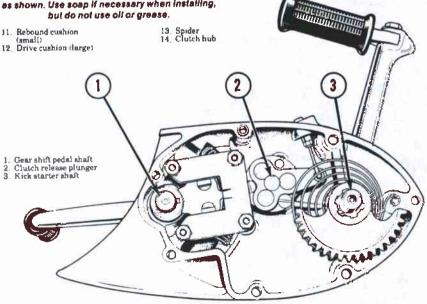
View of gear box outer cover. Refer to Fig. TM4-30 for exploded view of the operating assemblies.
